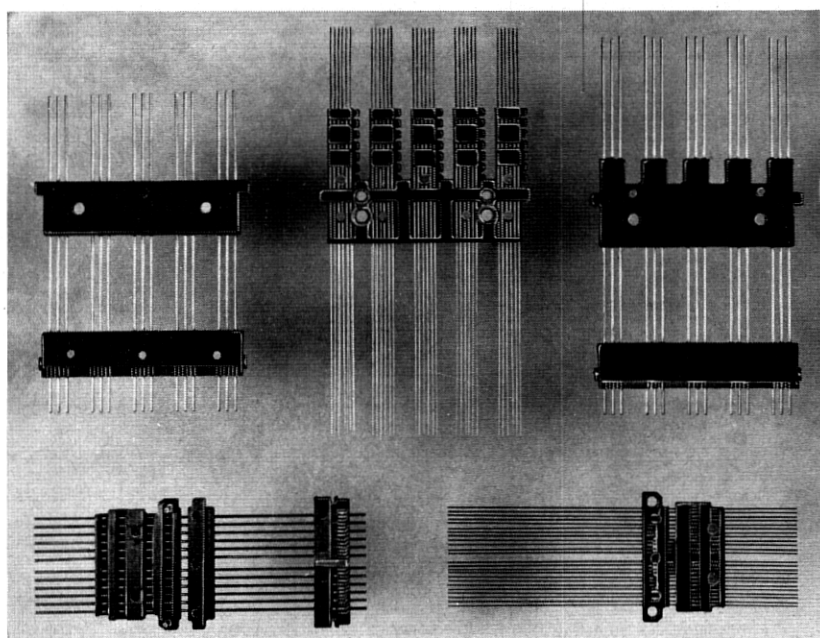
Wire block assemblies as manufactured for wire spring relays.
